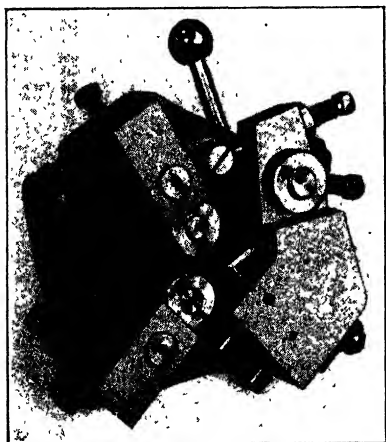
Box tool. (Courtesy Jones & Lamson Machine Co.)
